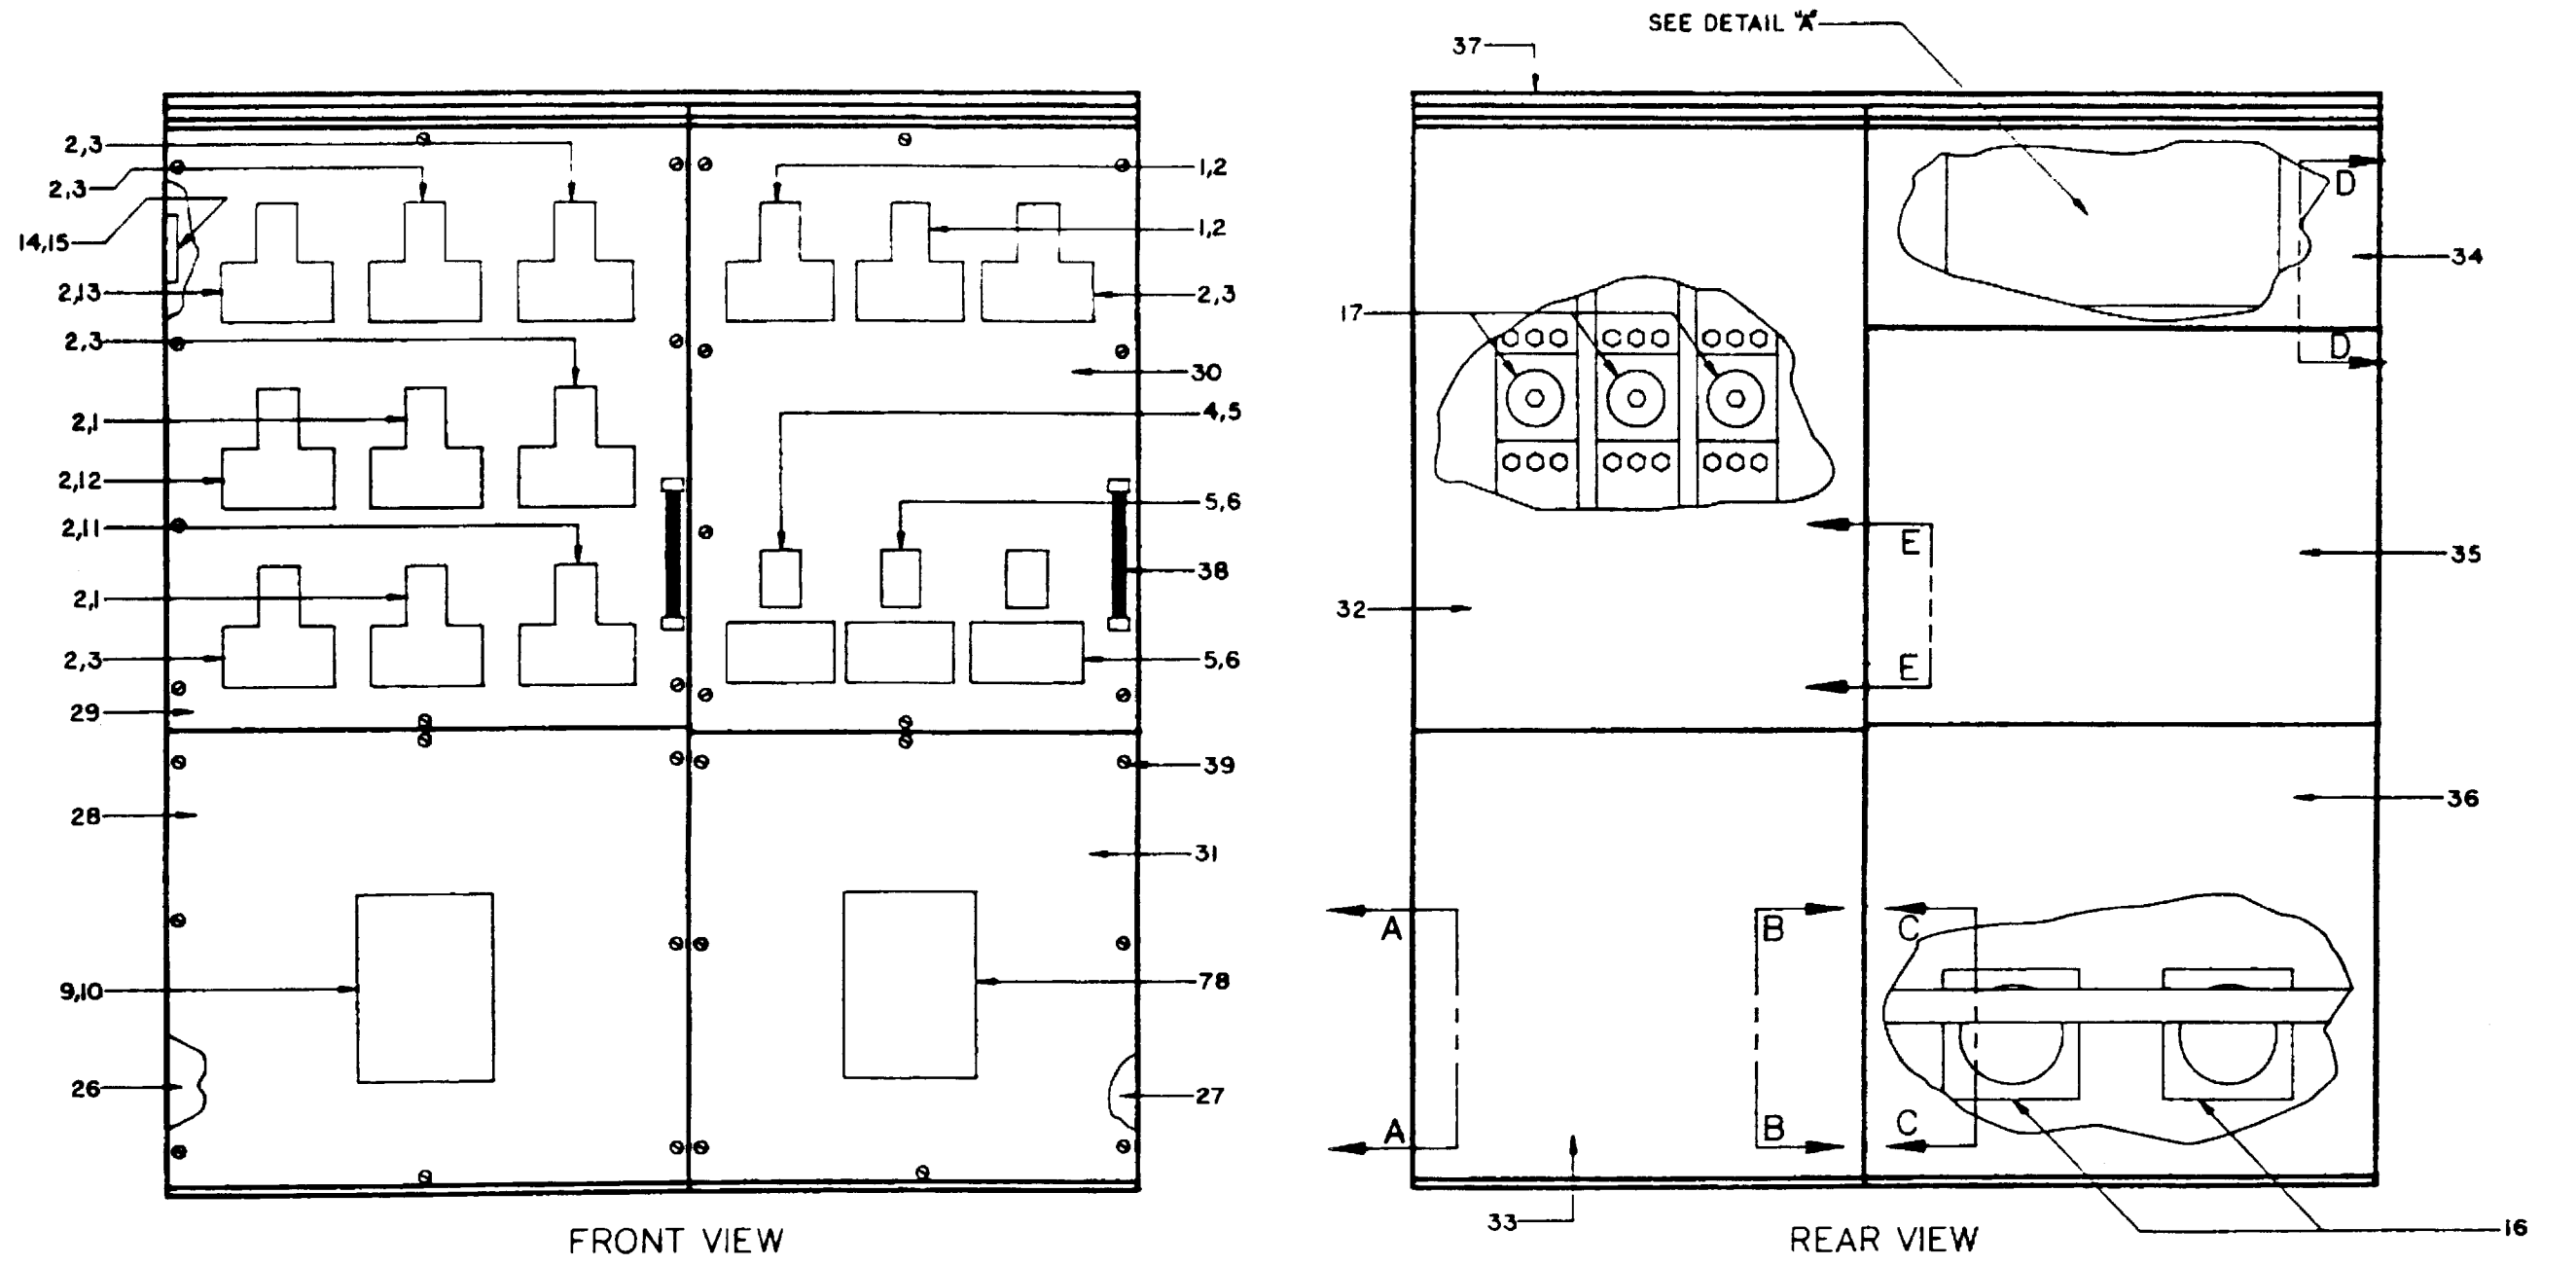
ISA Switchboard Assembly (Sheet 1 of 2)
